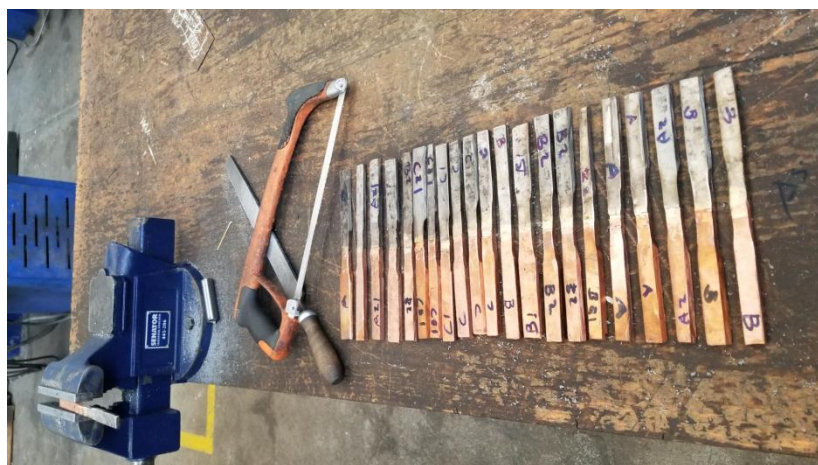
Welding sample for Ss - Cu before testing
